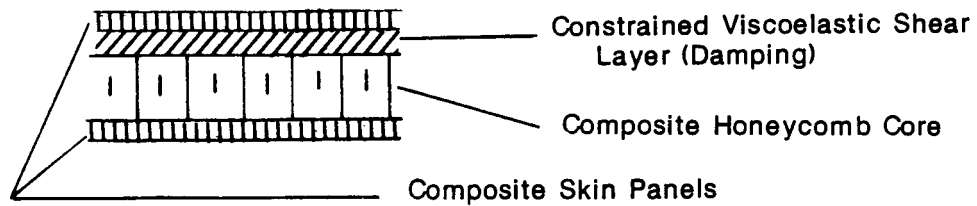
Typical Constrained Layer Damping Composite Panel Cross Section
